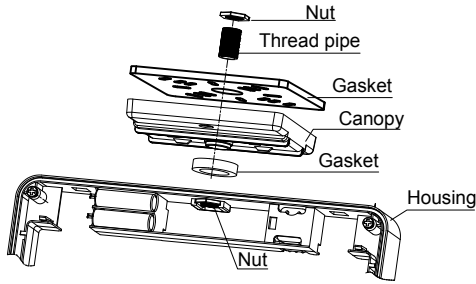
Use provided thread pipe and 2 nut fix canopy on unit, put gasket between unit and canopy.
